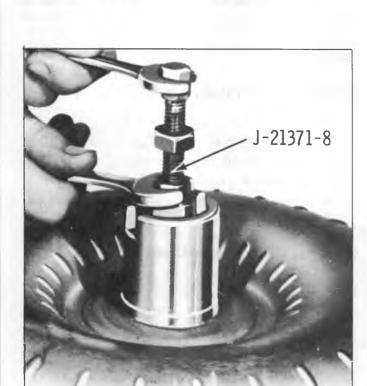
T-A-Loosening Collet on Tool J-21571-8
